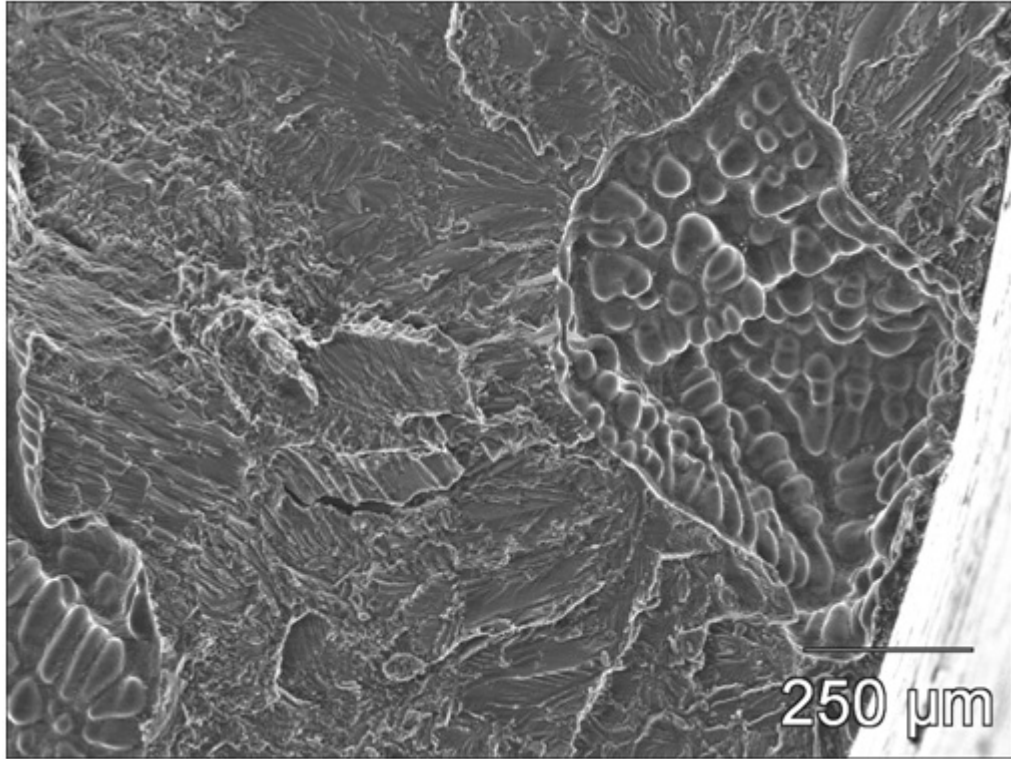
Fracture surface of machined 356-T6 fatigue specimen ($R=0$, maximum load 3345 N, cycles to failure 470,594, defect area 0.10 mm²).
